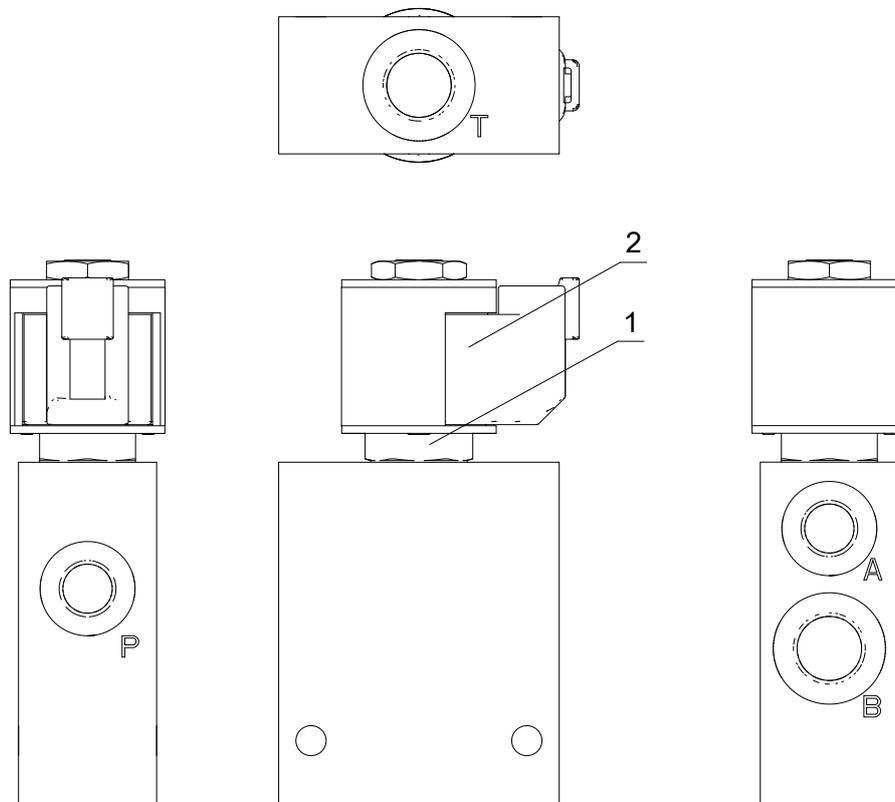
Emergency Lowering Valve (PN.202040003268)
